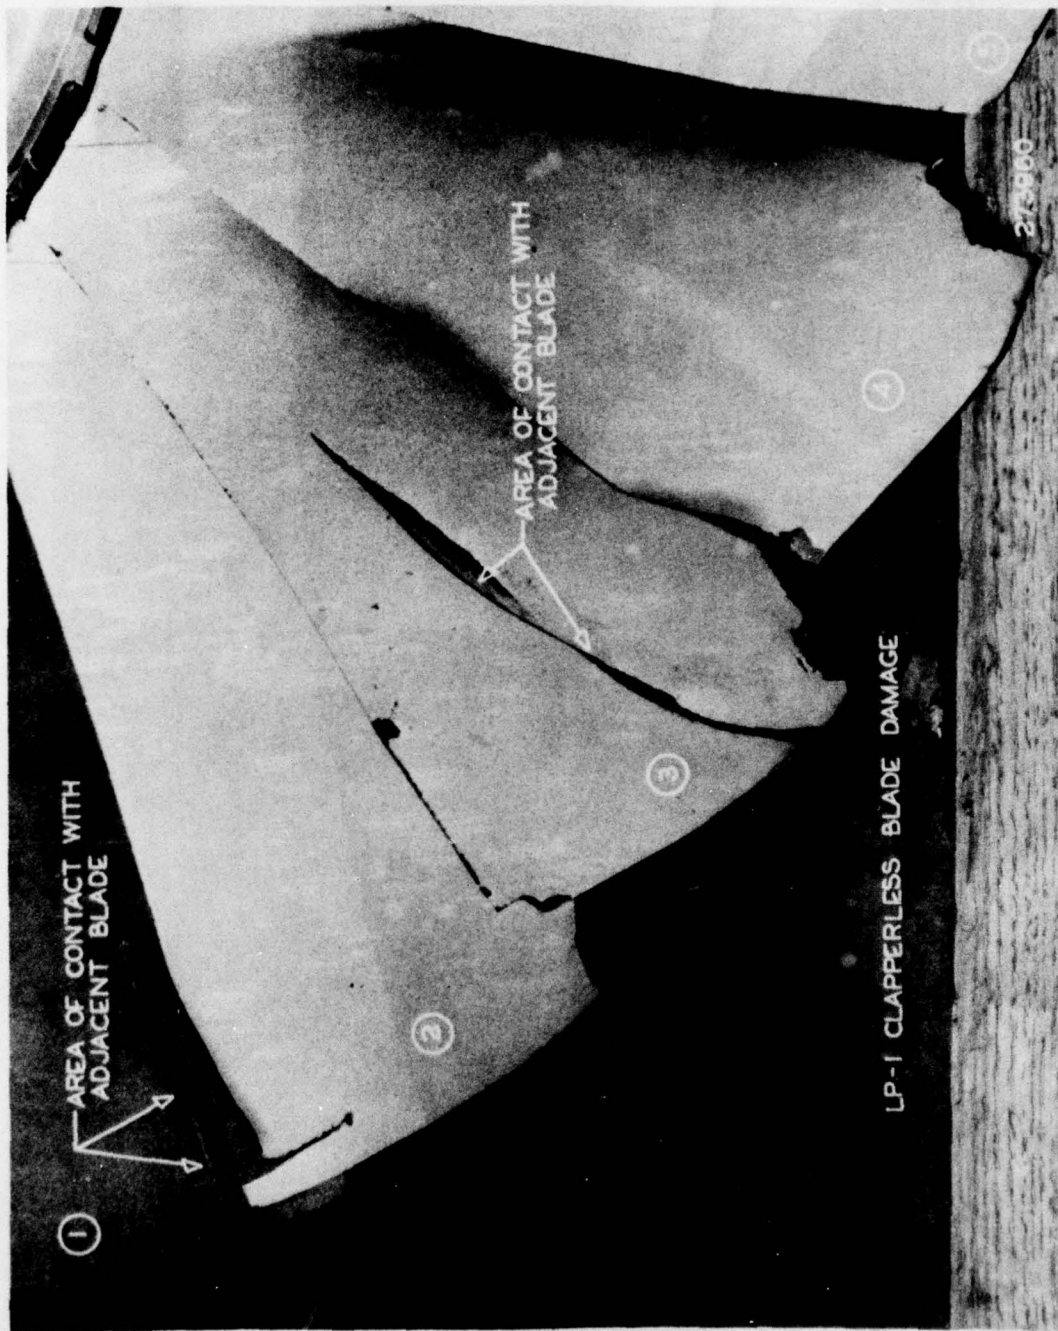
Blade Damage After 4 lb. Bird Impact In An Engine
